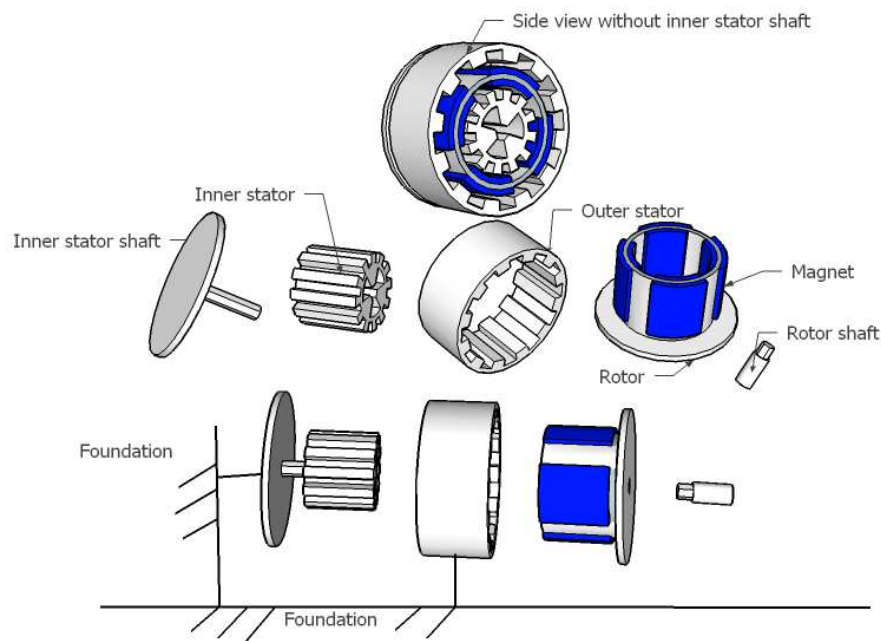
3D mechanical assembly illustration of a simple DSCRPMG
